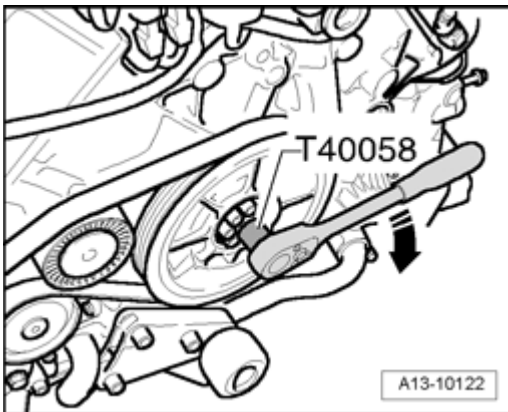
Counter Holding Crankshaft Using Adapter T40058 To Loosen Torque Converter Bolts
